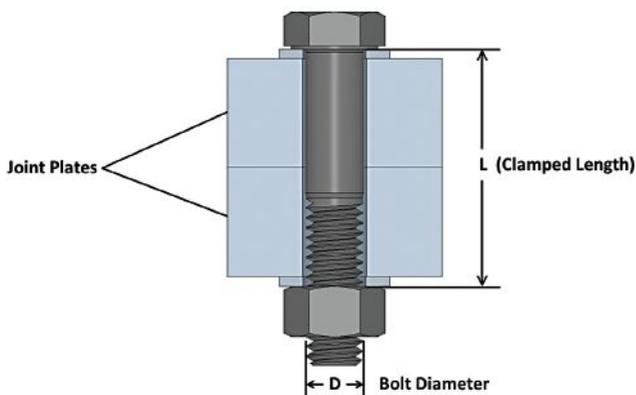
A bolted joint (image courtesy of Matrix Engineering Consultants).
